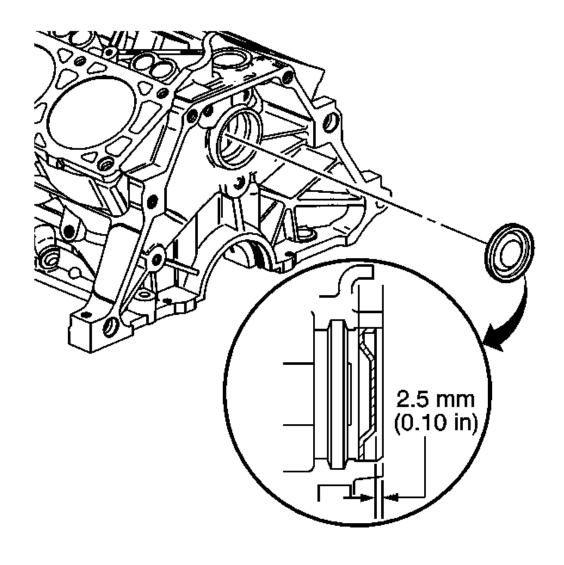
Identifying Camshaft Rear Bearing Hole Plug Installation Depth Courtesy of GENERAL MOTORS CORP.
